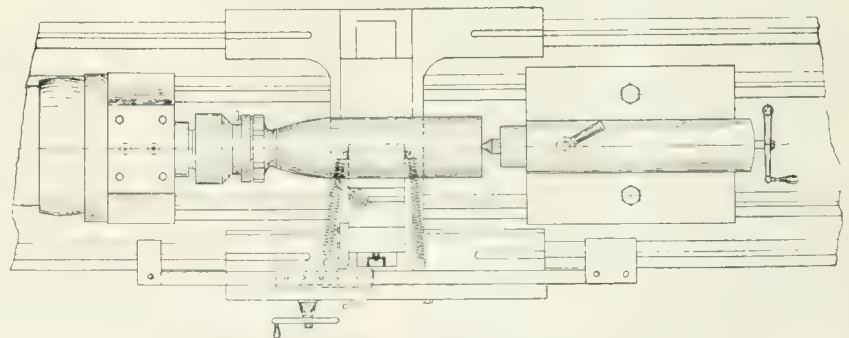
PROFILE ATTACHMENT FOR TURNING OUTSIDE OF 4.5 INCH H. E. SHELL ON ENGINE LATHE.
